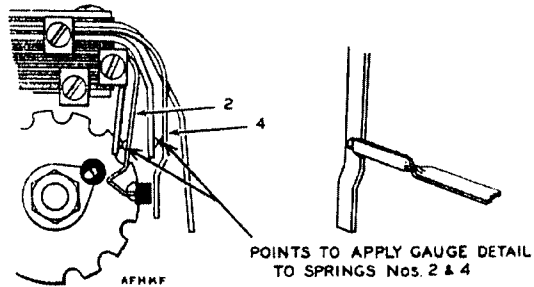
CHECKING TENSION OF SWITCHING SPRINGS
